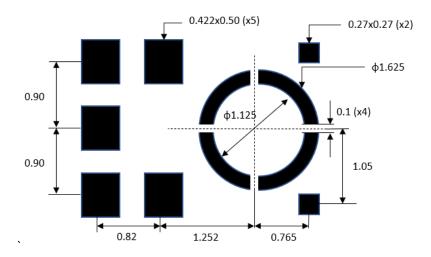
Suggested Solder Paste Stencil Pattern Layout
